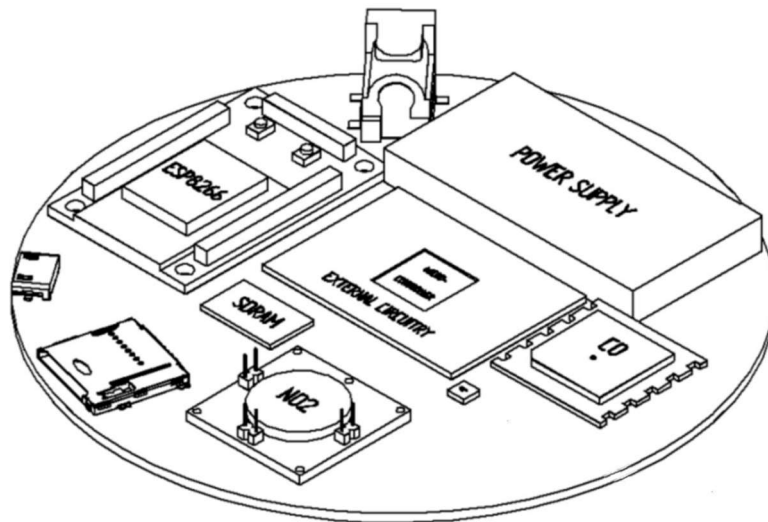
First PCB hypothesis: circular shape. Taken from (Bevilaqua D. ,2023)
